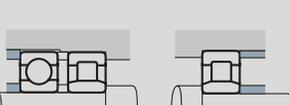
Bearing Mounting Arrangements and Bearing Types
